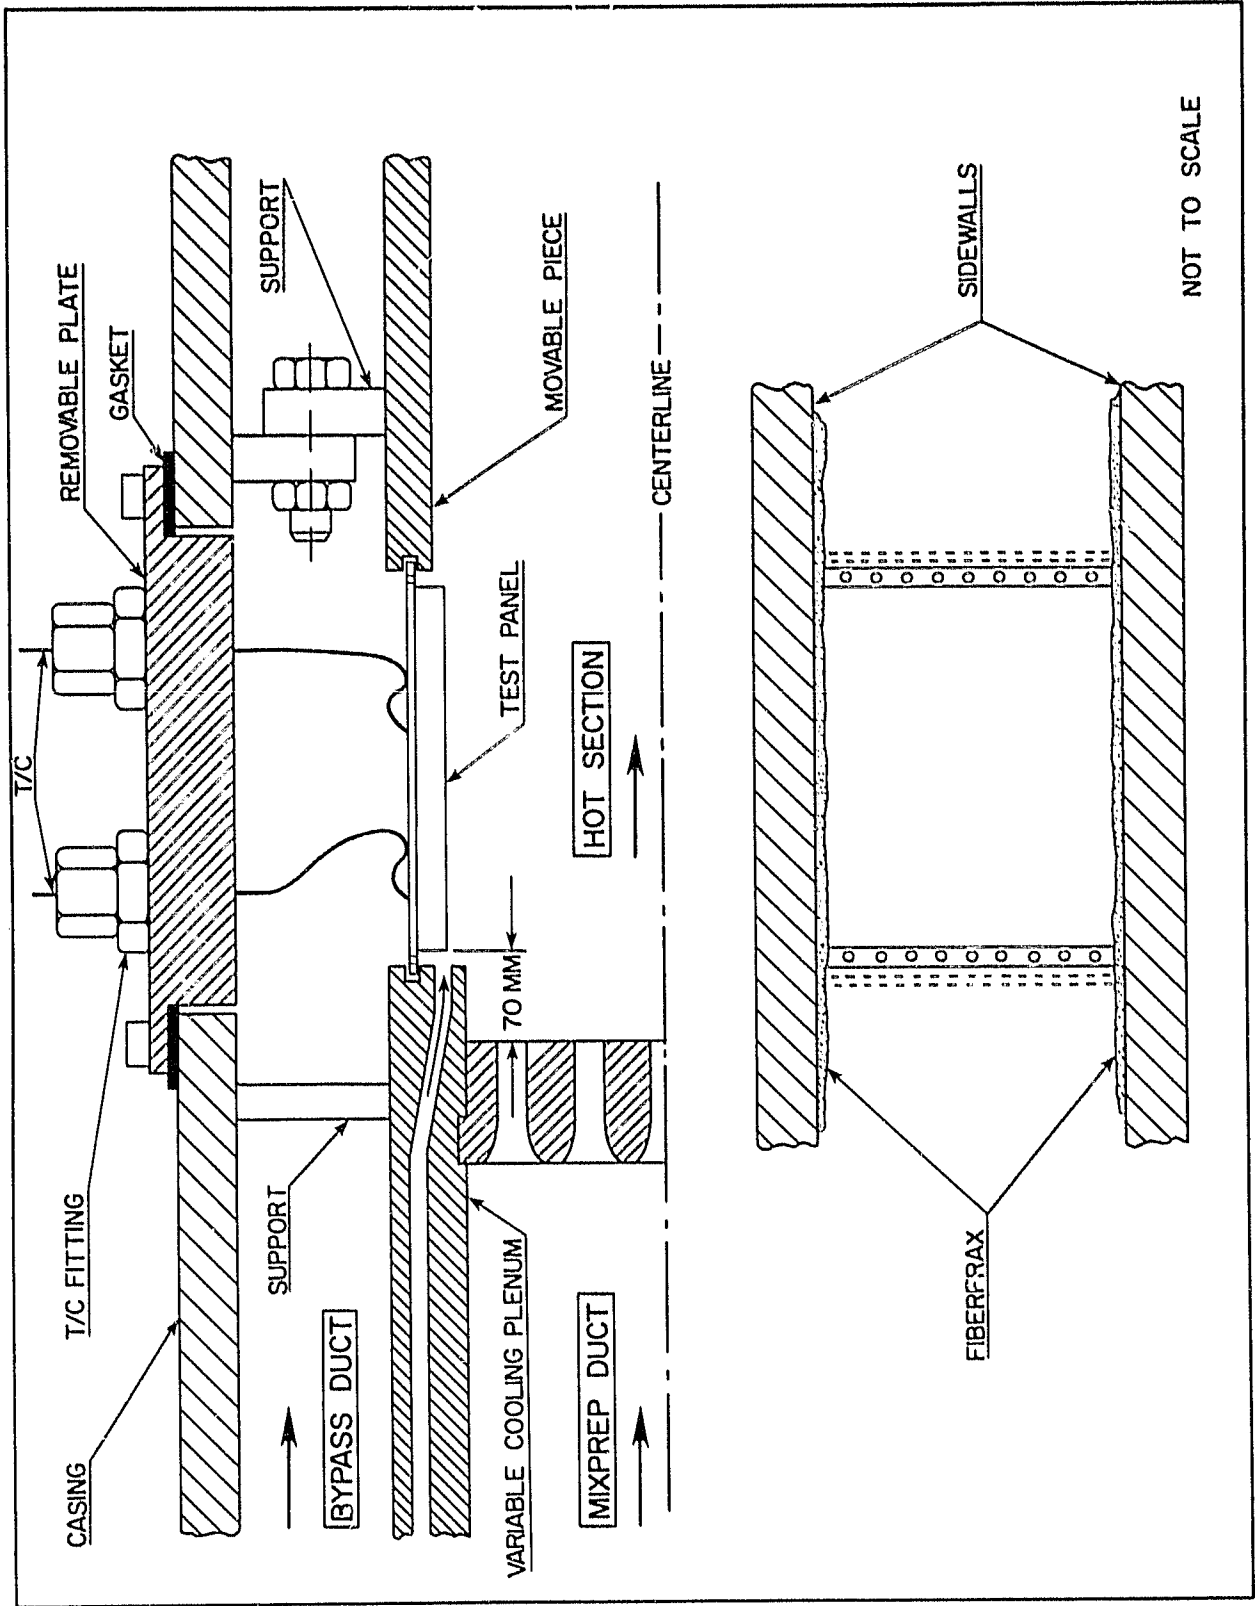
TEST PANEL INSTALLATION DETAILS
